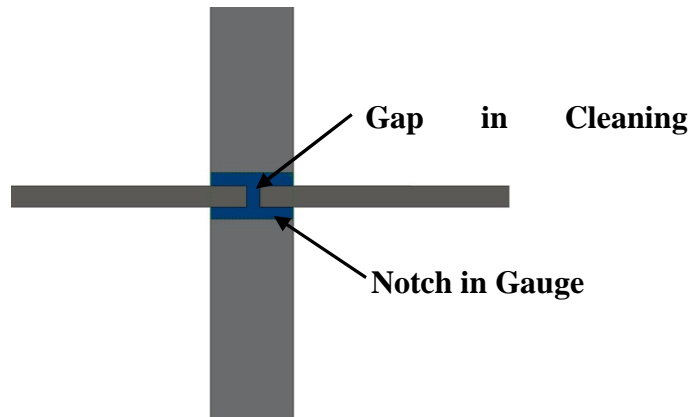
Front View showing notch in gauge used for locating the cleaning device
